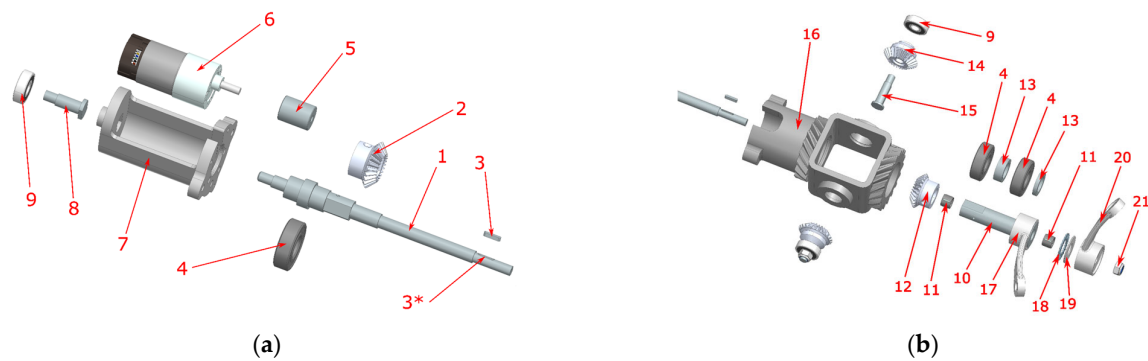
Contra-rotating gearbox components: (a) exploded view of the input-side components; (b) exploded view of the output-side components.
